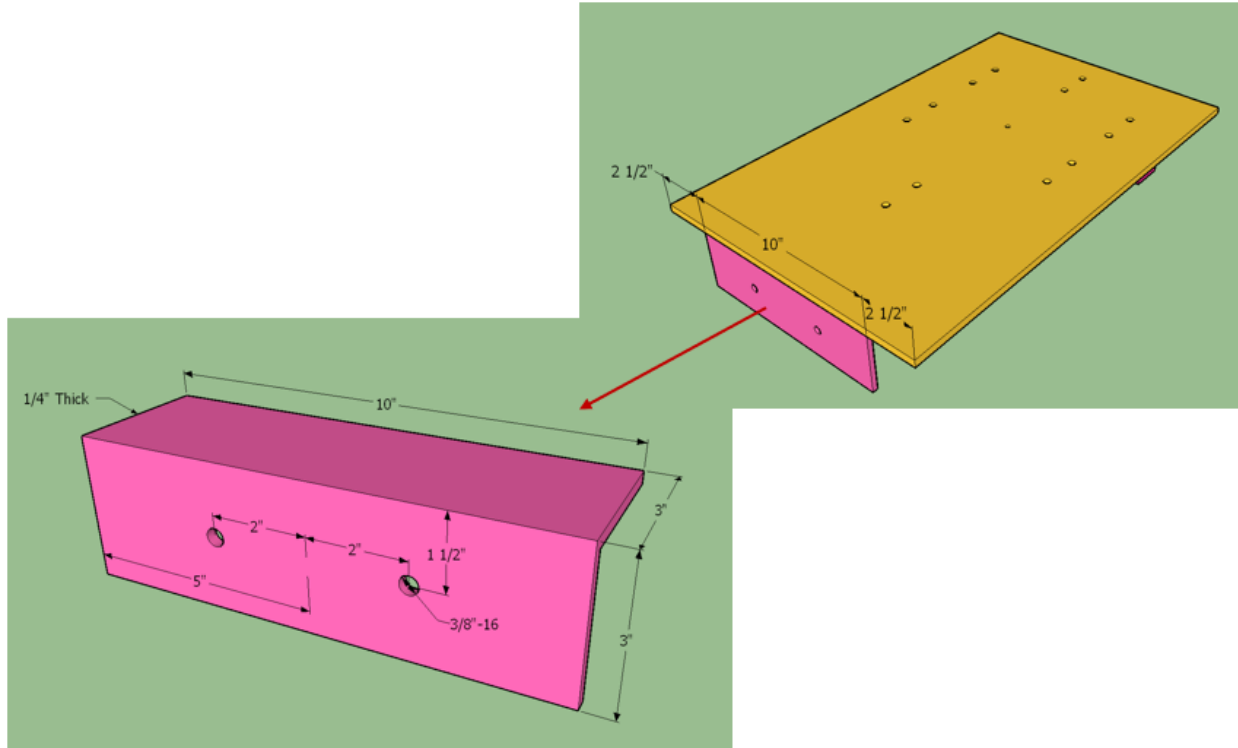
Left Flange of the Base Plate- Sample Holder of Rectangular Specimens.
